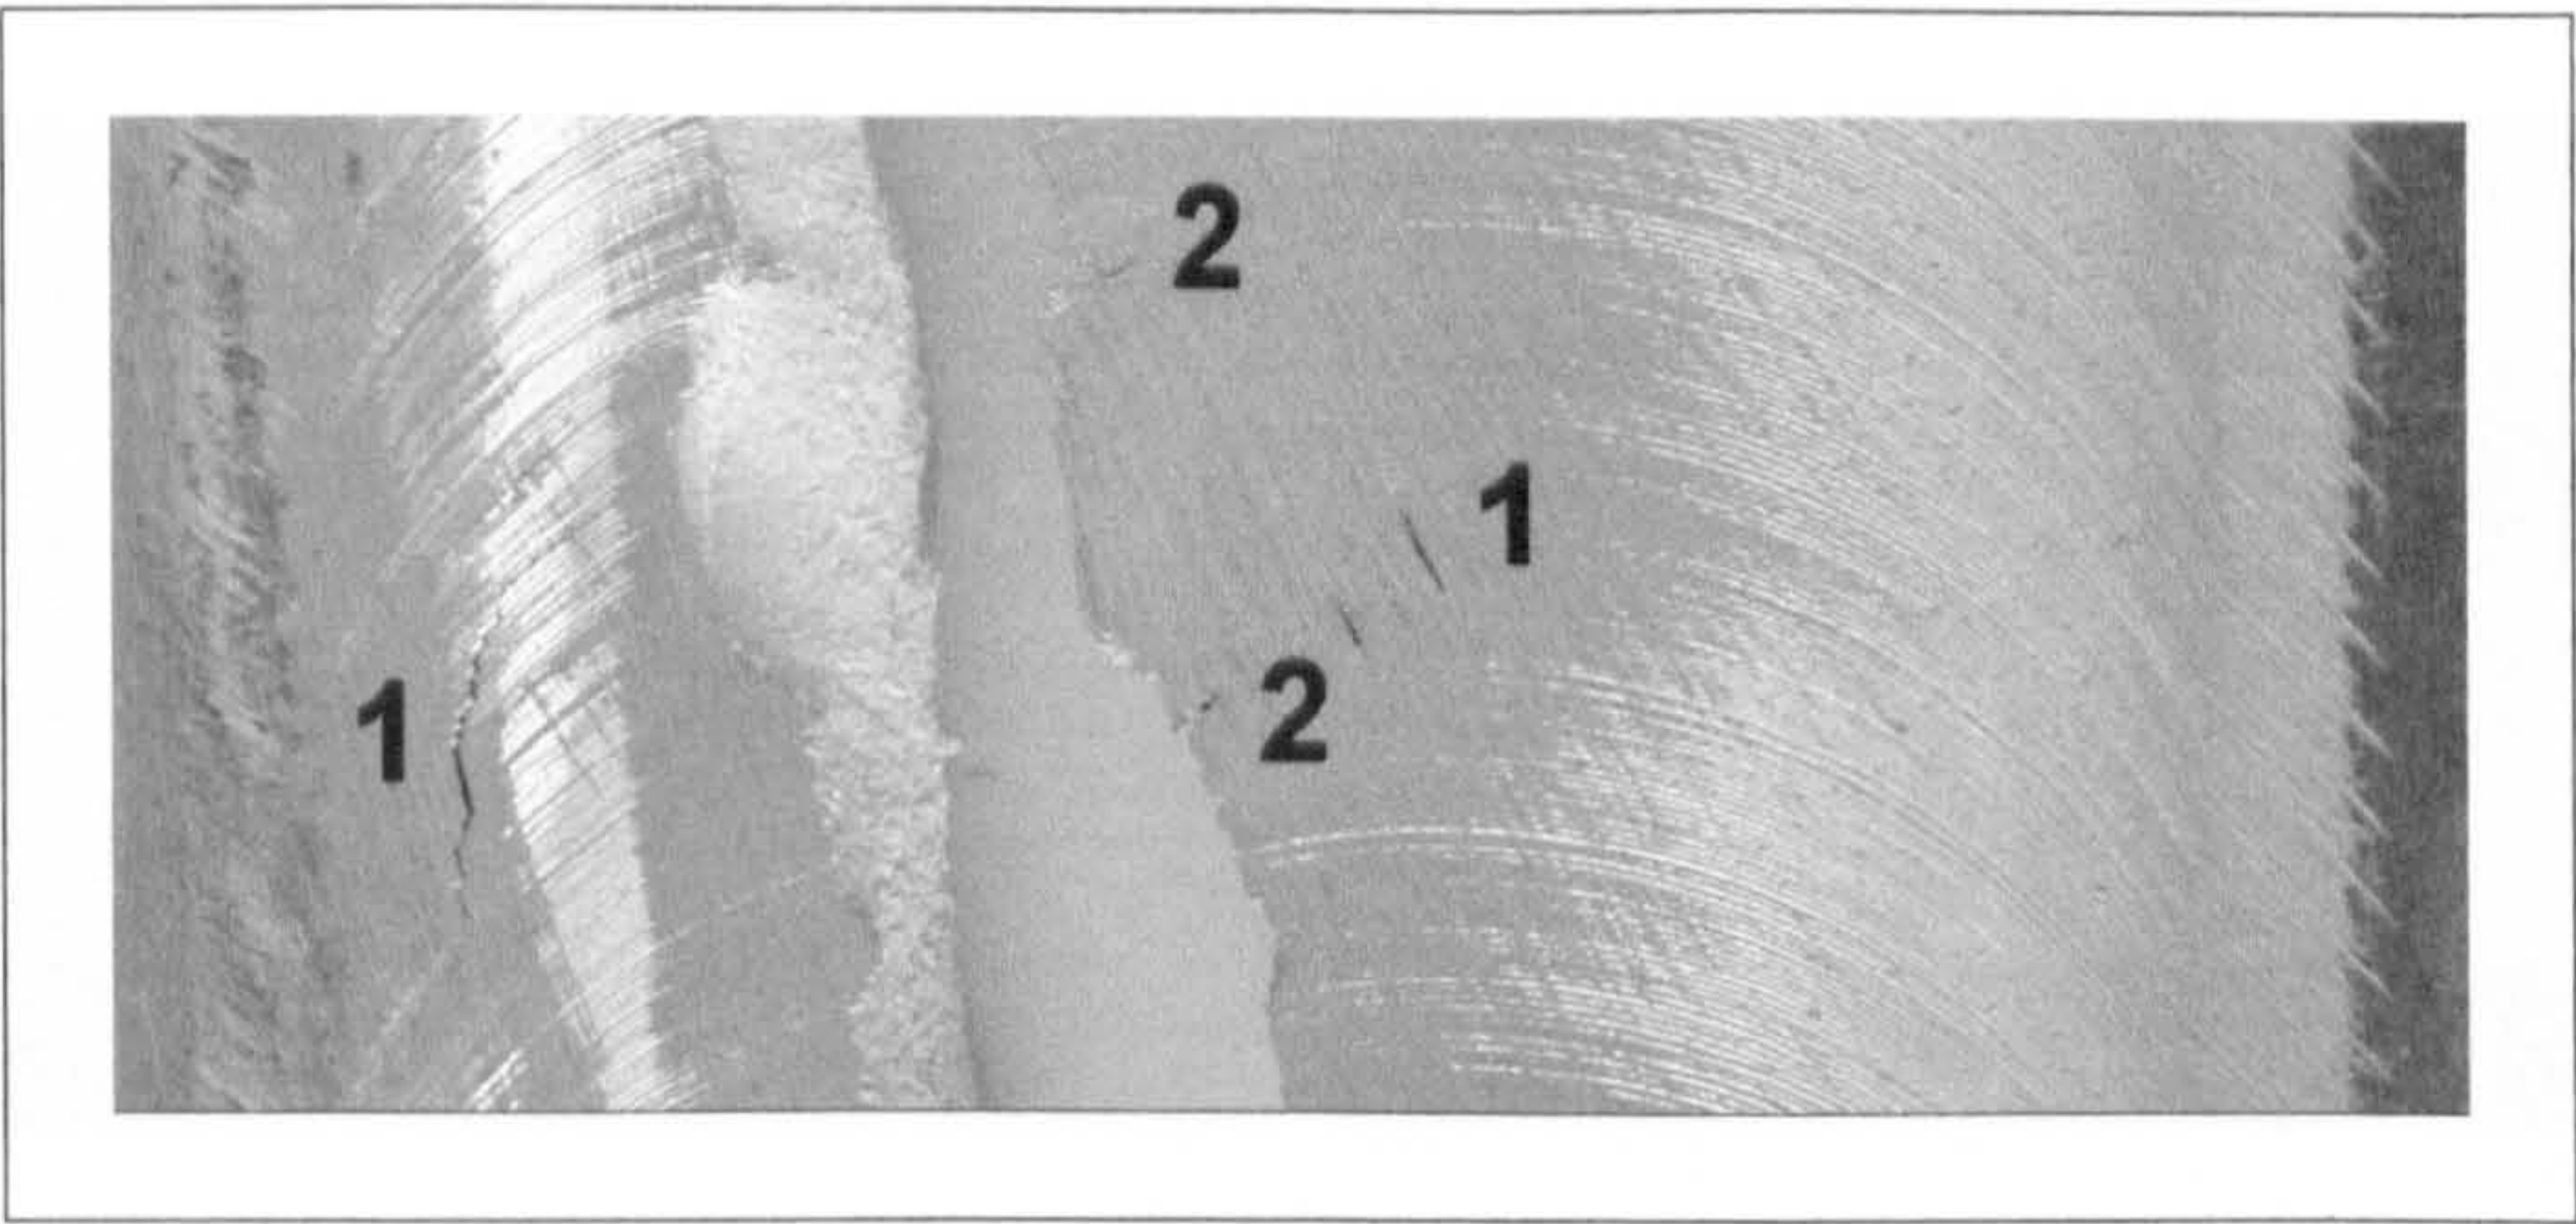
Secondary initiation sites; removal of weld flash machining marks (1), tool shoulder marks (2) (FS SP 1).
